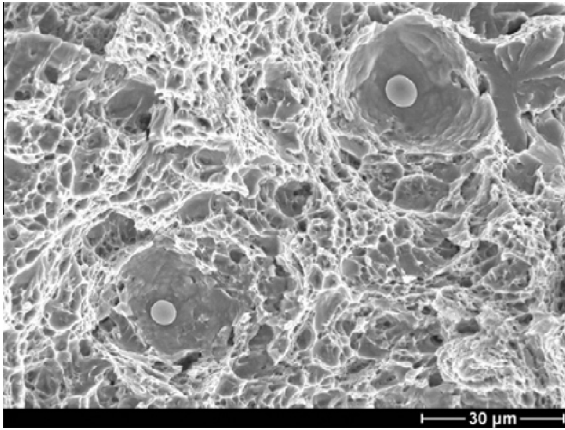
Fracture surface after ductile failure in a pressure vessel steel (Seidenfuss et al., 2011).
